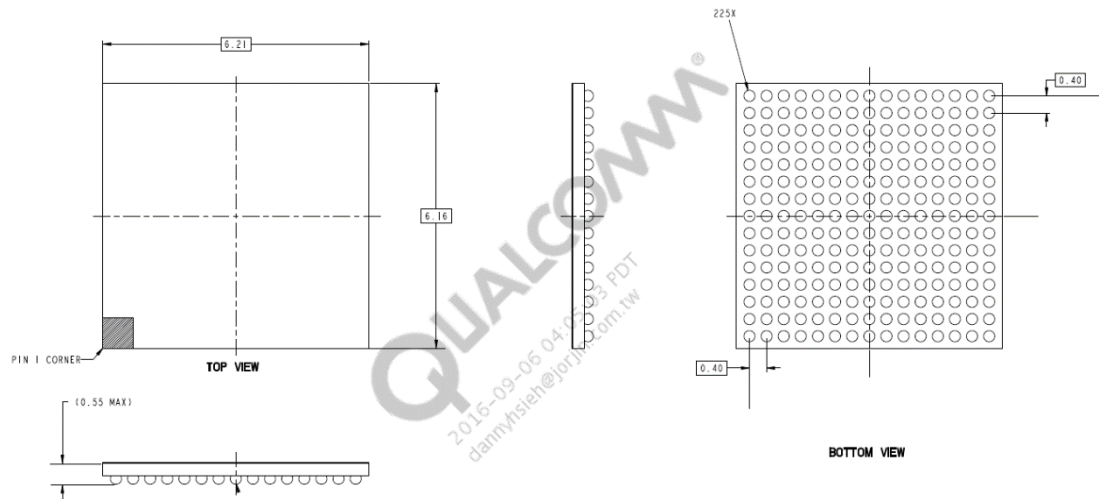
225WLNSP 6.21x6.16x0.55 package outline drawing
